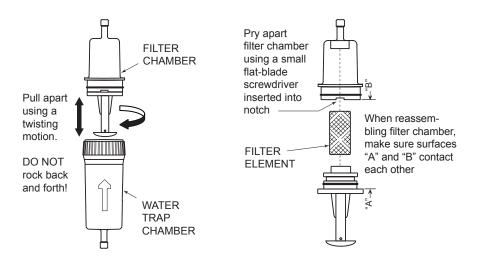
Disassembling the Water Trap / Filter Assembly
